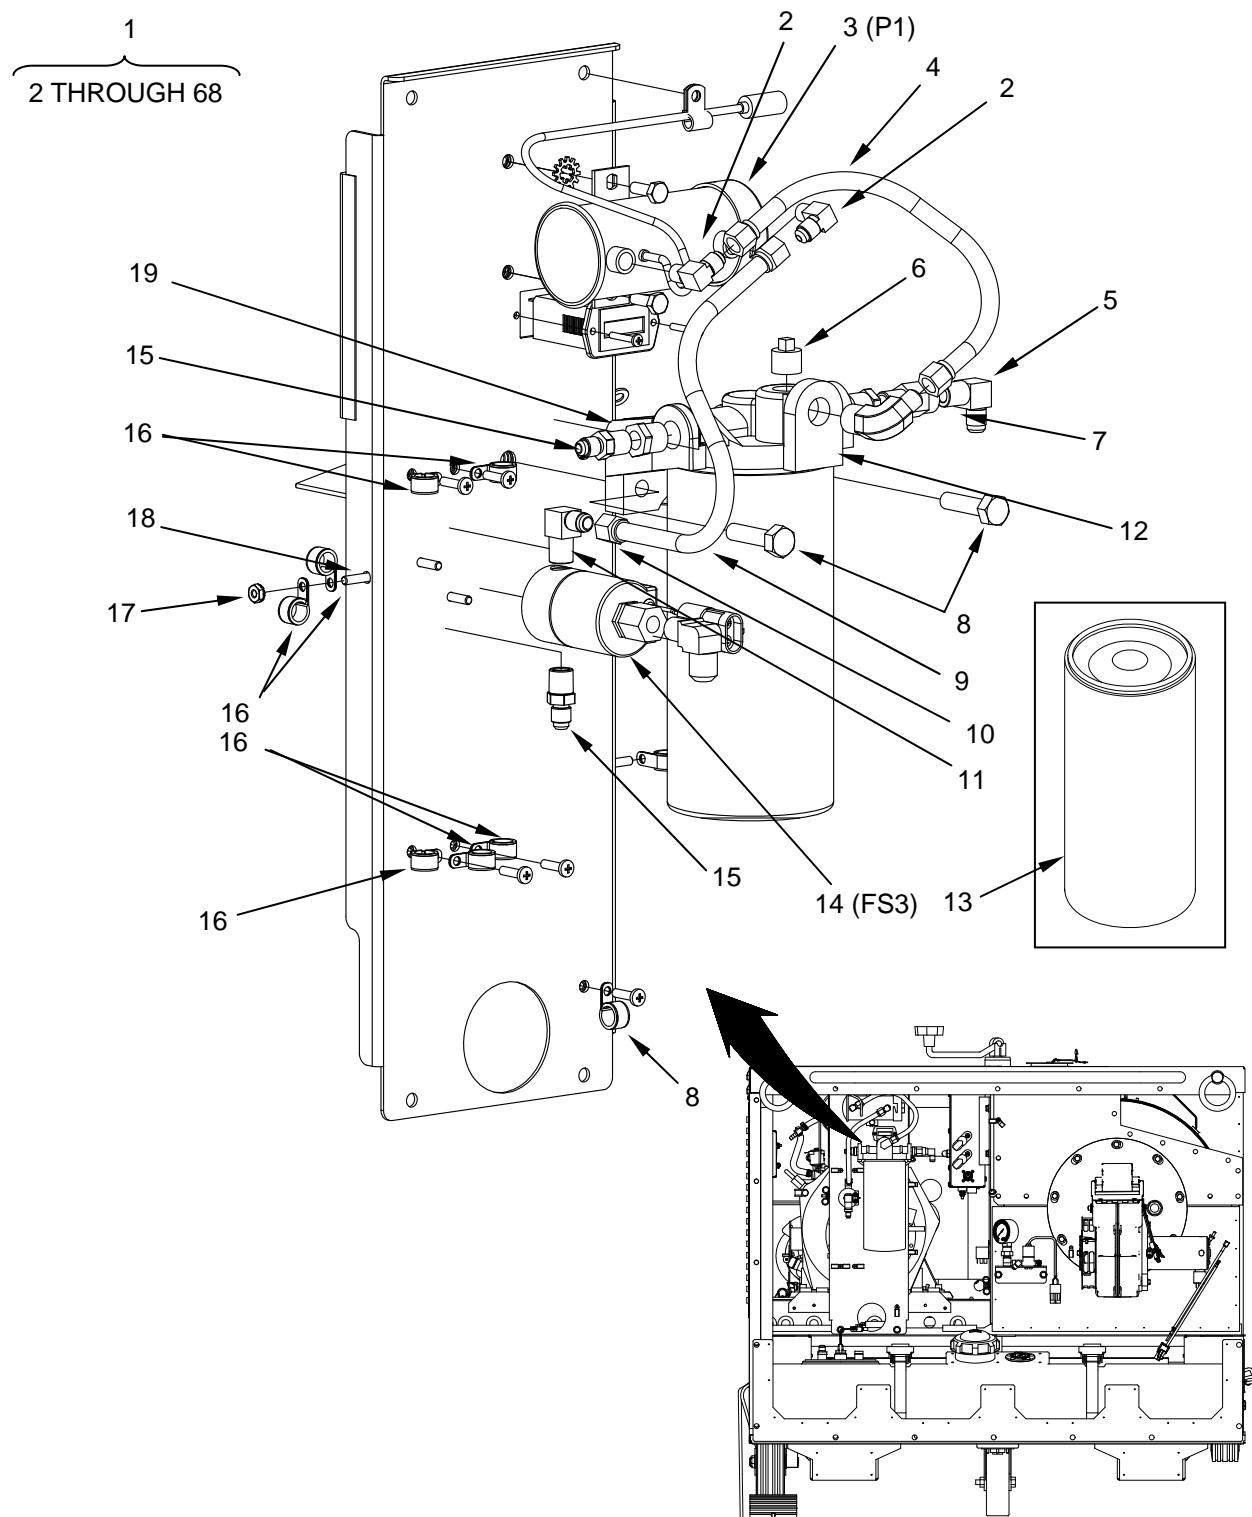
Fuel System Assembly (Sheet 1 of 4).
